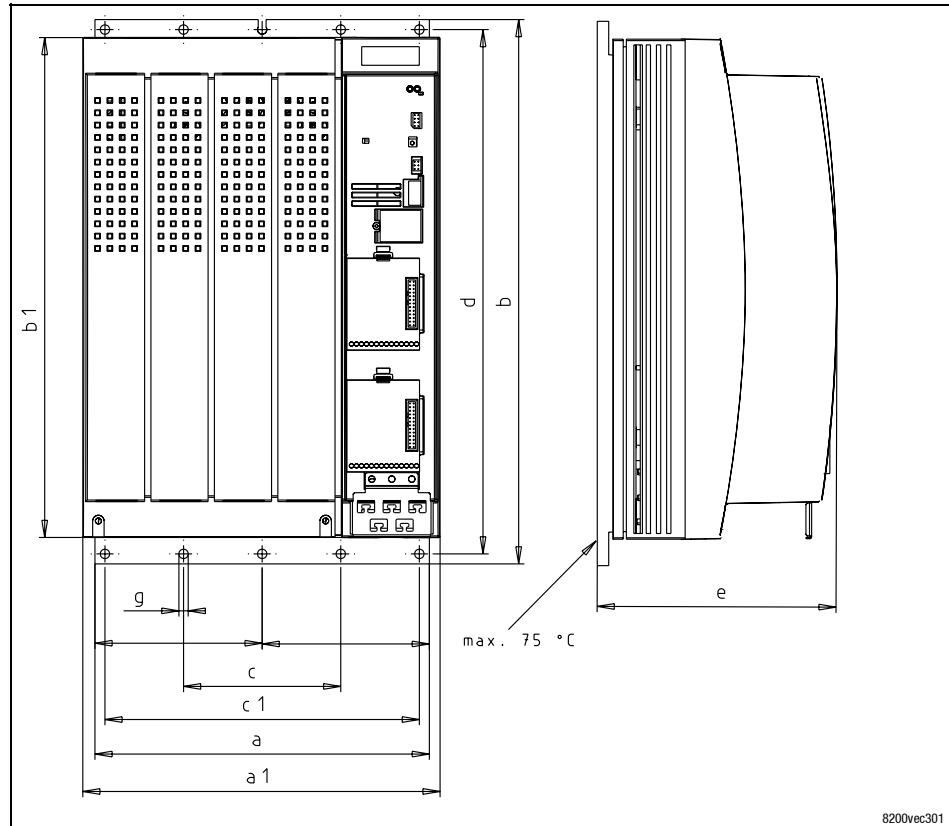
Dimensions for 8200 vector in "cold plate" technique 15 ... 22 kW
